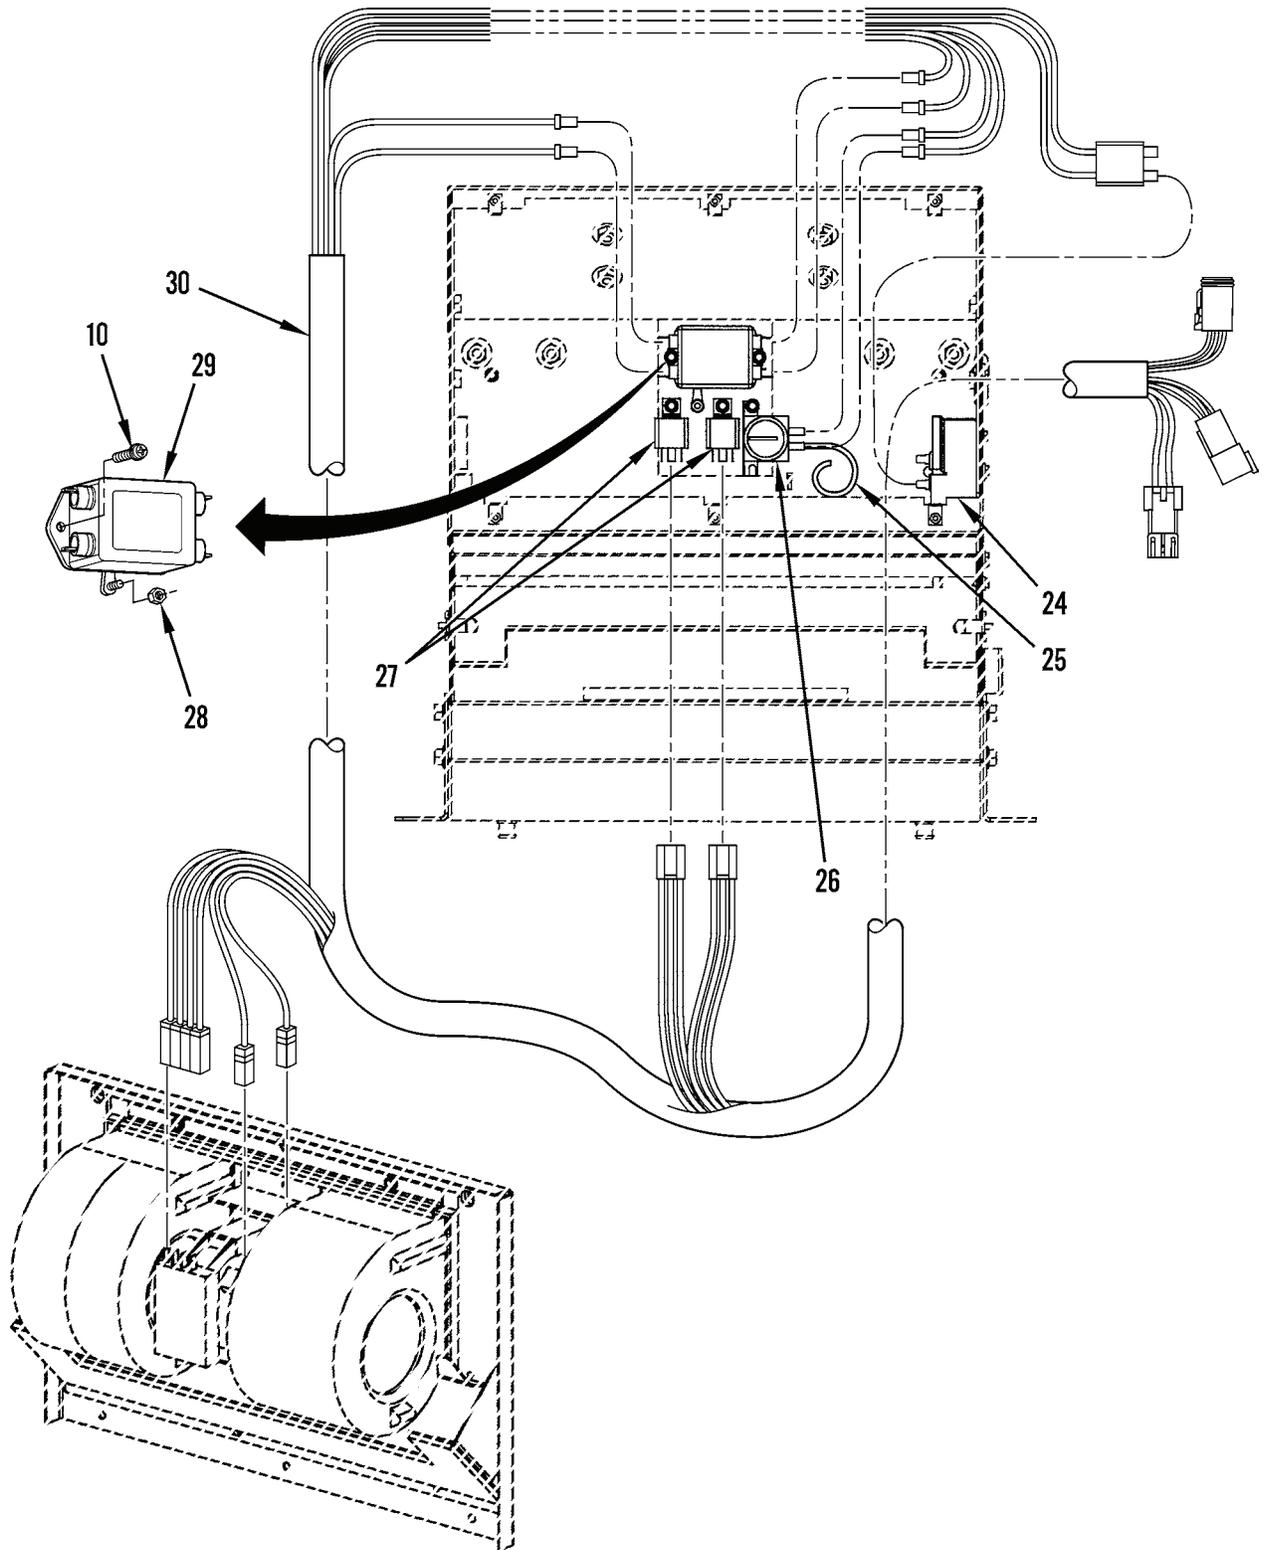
A/C Evaporator Assembly and Mounting Hardware (Sheet 2 of 2)
